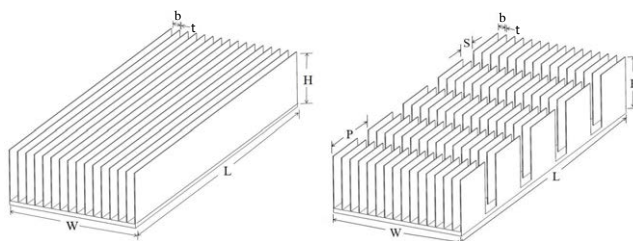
(a) flat plate fins heat sink and (b) strip fins heat sink
